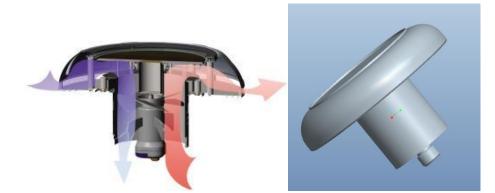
Left: Cutout view of the solar vent considered. Right: Pro-Engineer model used in the initial design.
